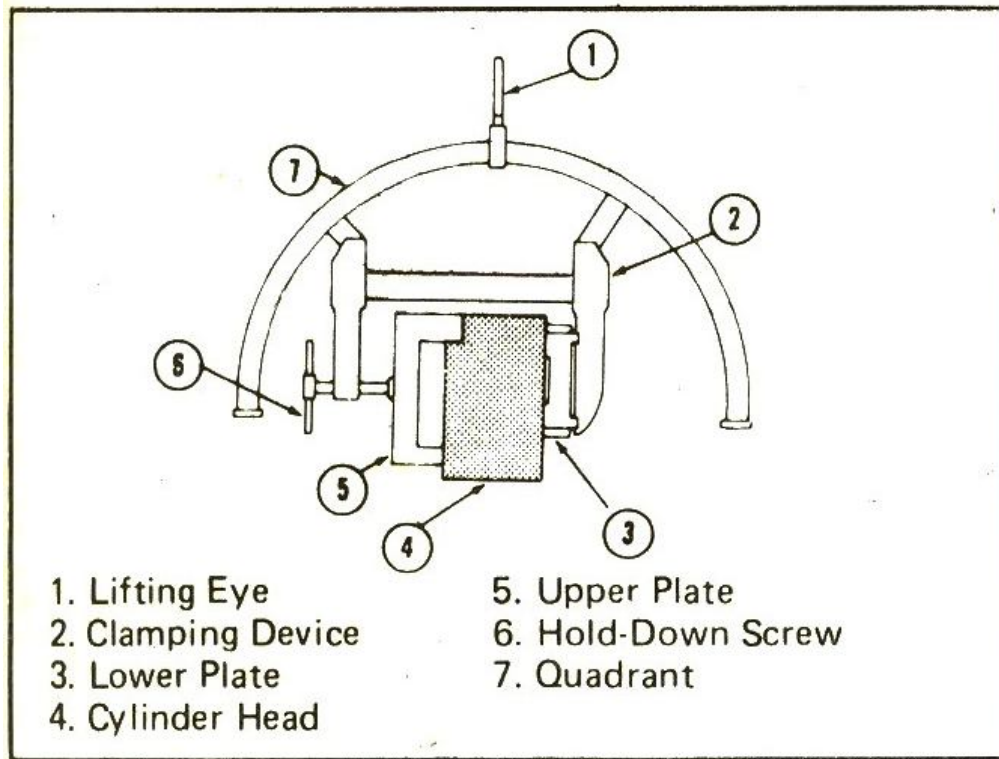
, Cylinder head installed in the ST-1012 Hydrostatic Tester
